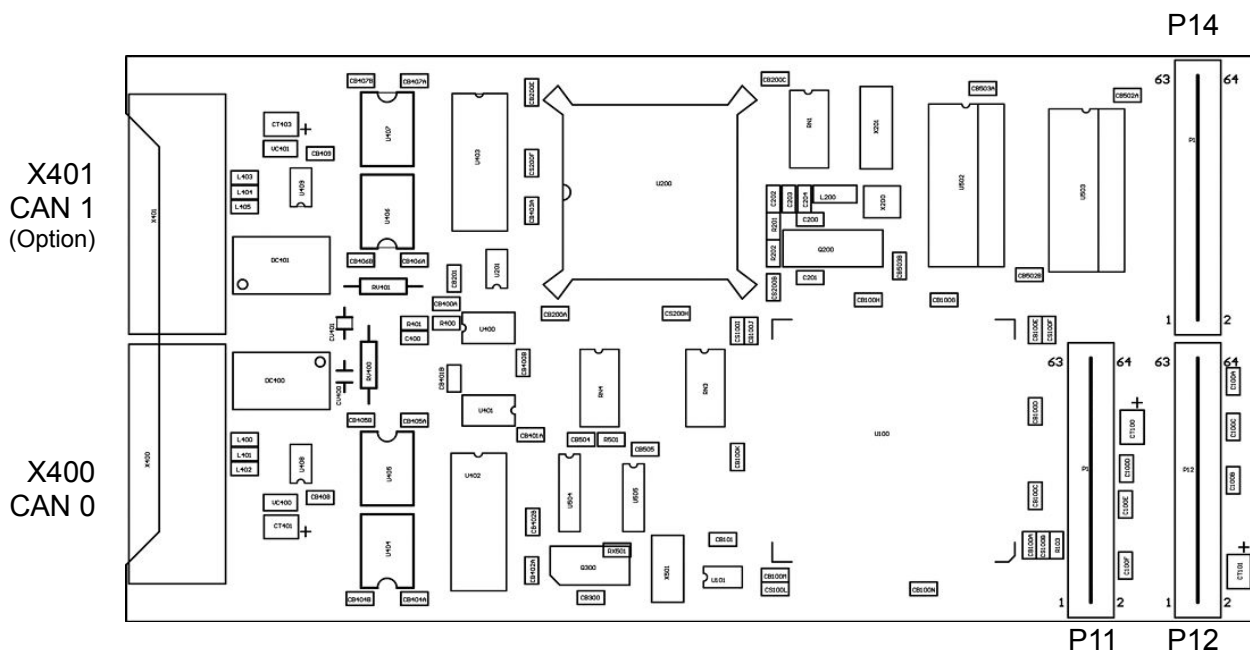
View of PCB layer and connectors facing the carrier board (PMC-CAN/331-3.3-2)
